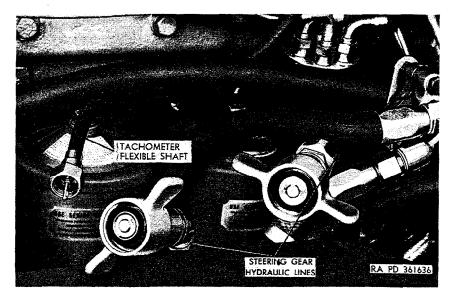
Steering gear hydraulic lines and tachometer drive cable (disconnected) at left side of engine.
